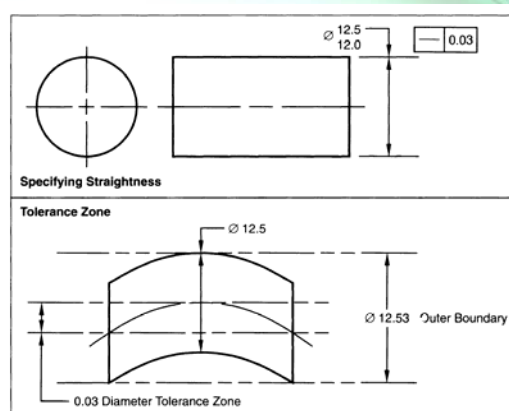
Straightness tolerance applied to an axis
